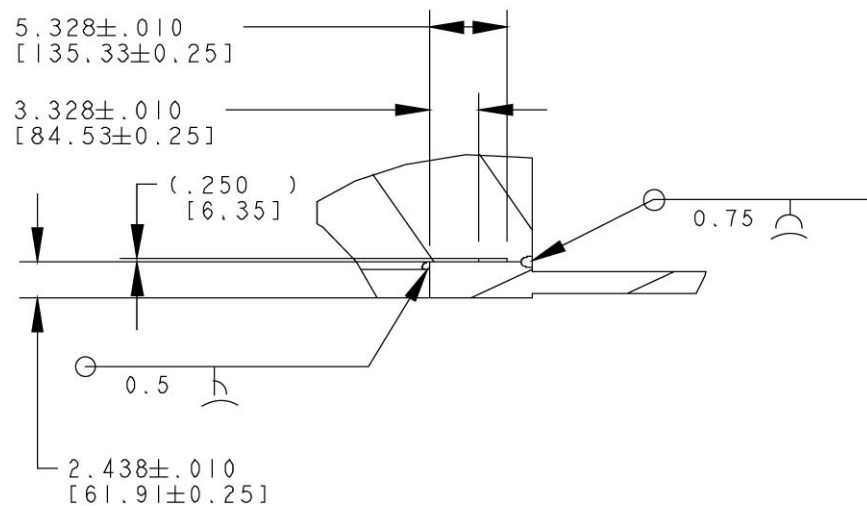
Vacuum J-Groove Weld detail Structural U-Groove Weld detail
